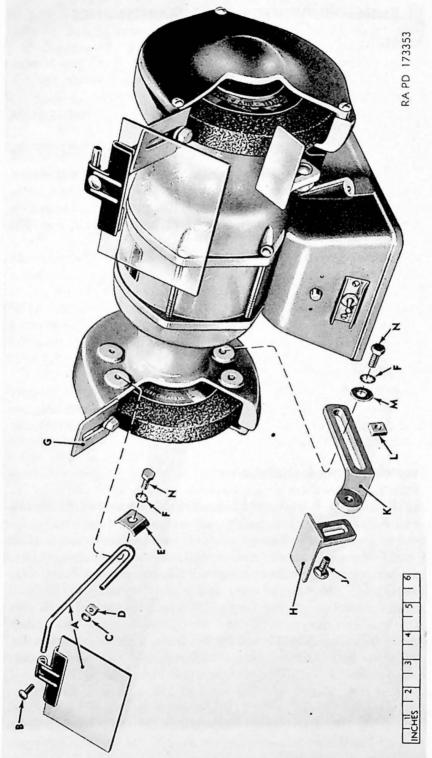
Shatterproof glass eyeshield with adjusting arm—40-S-1746-800, tool rest, and tool rest support—exploded view.
